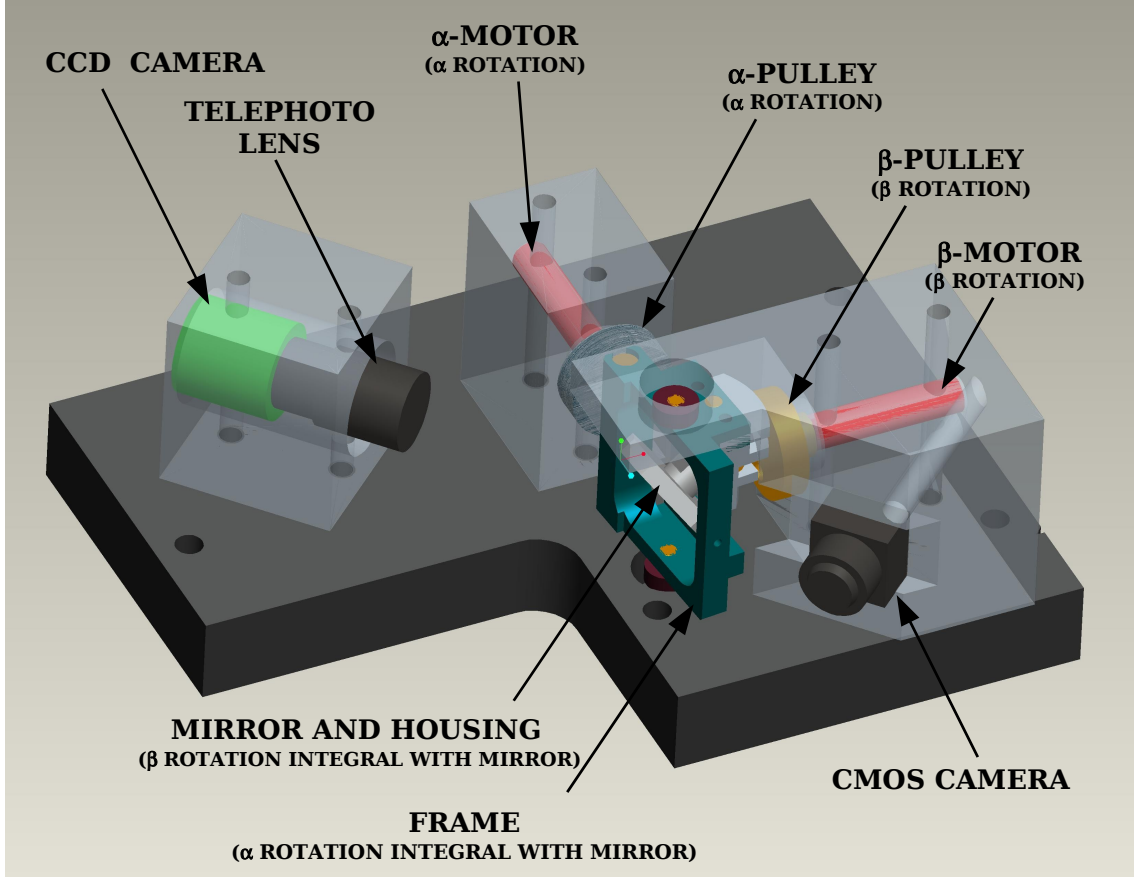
CAD drawing of the vision system, highlighting the main components.
